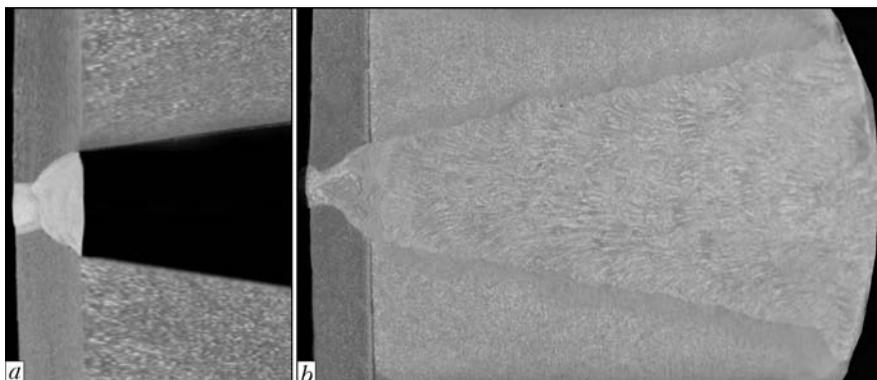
Weld macrostructure in the cladding layer (*a*) made in the welded joint of clad pipe steel by the developed technology (*b*)
